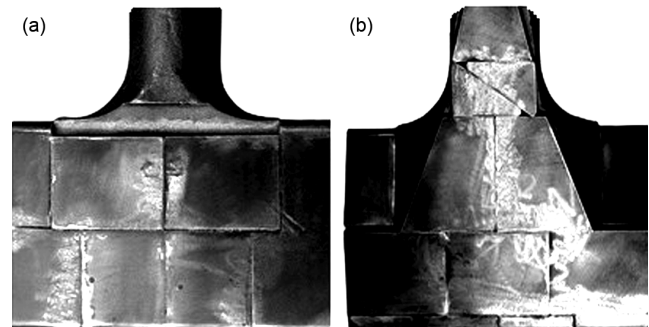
An actual diagram of tamping tool with (a) Front side of tool and (b)Rear side of tool.
